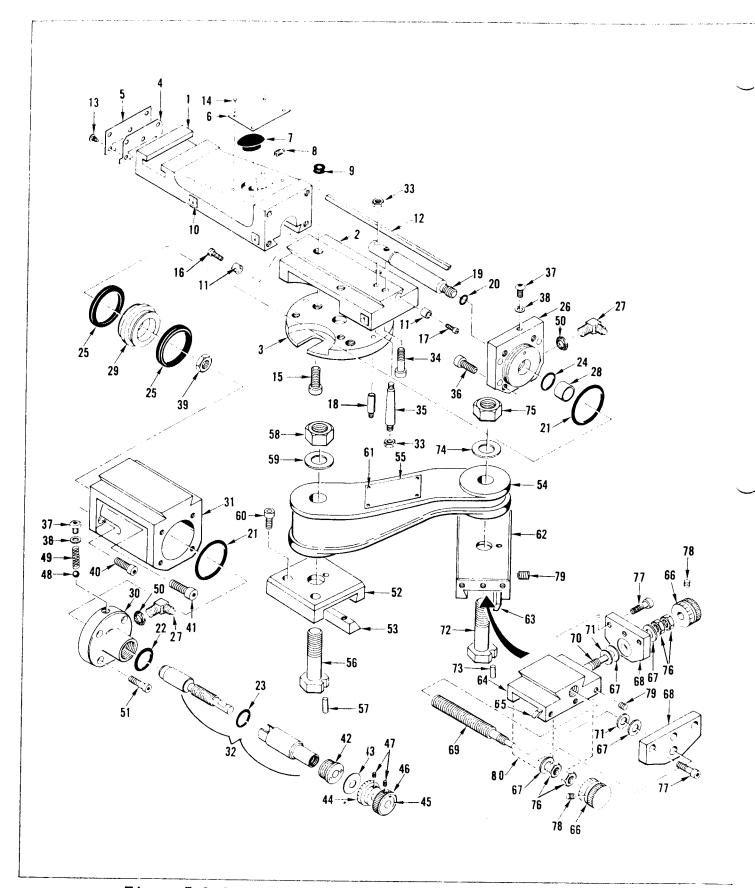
Exploded View of Mark IIA Series Lathe Tracer Attachment and  $\smile$
